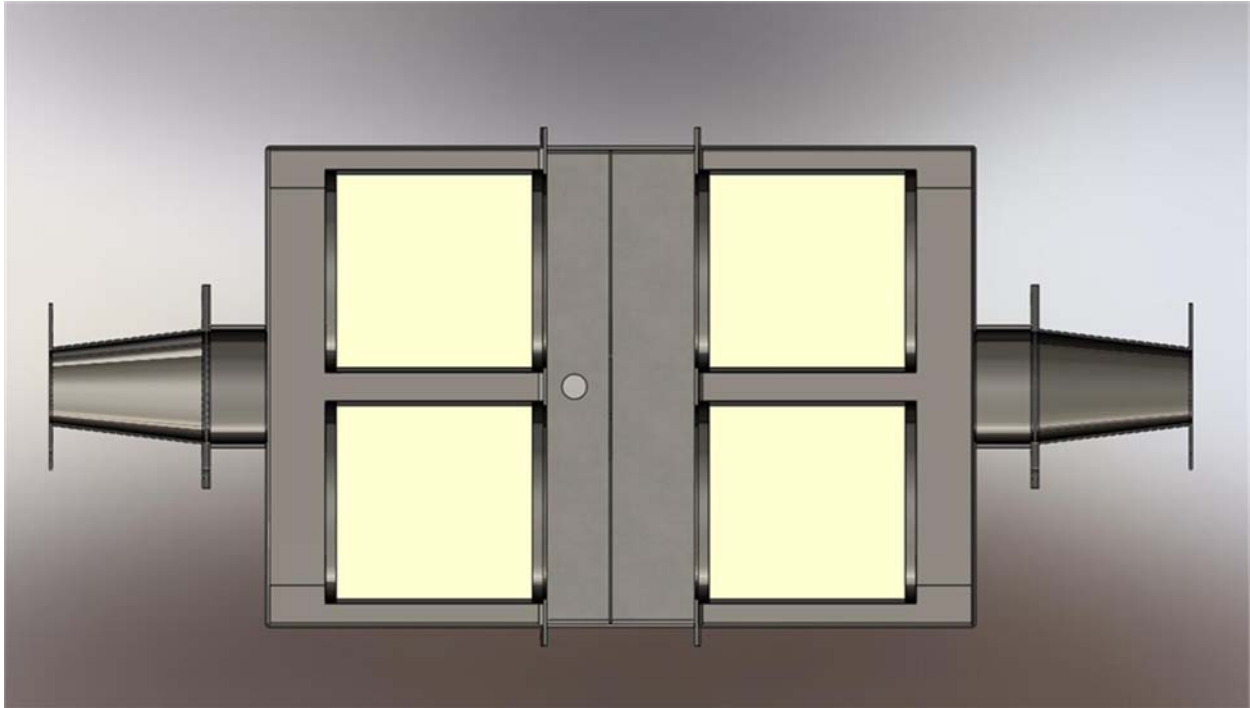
Cross section of the combined DPF and SCR catalyst assembly for the generator engine
